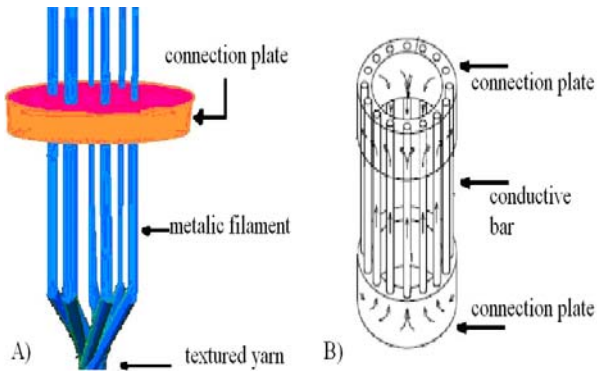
A) Suggested filament feeding system B) Squirrel cage rotor
